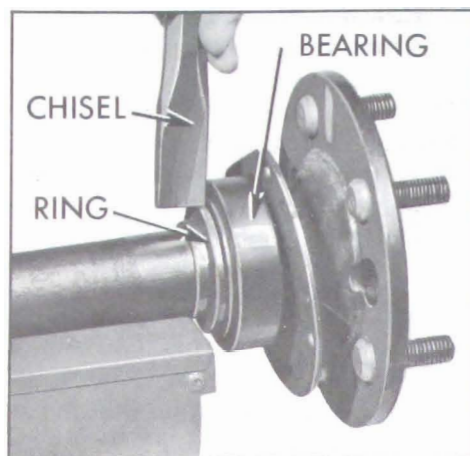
Removing Rear Wheel Bearing Retaining Ring
